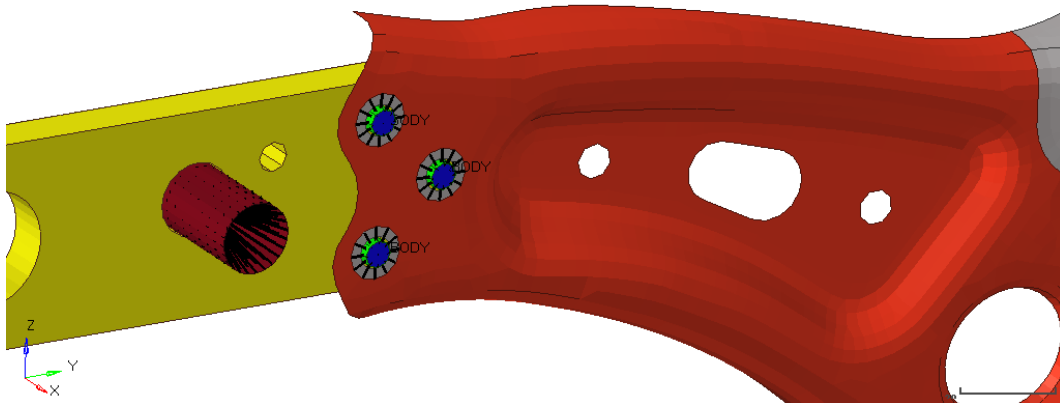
Model detail of the mechanical assembly to the testing machine
